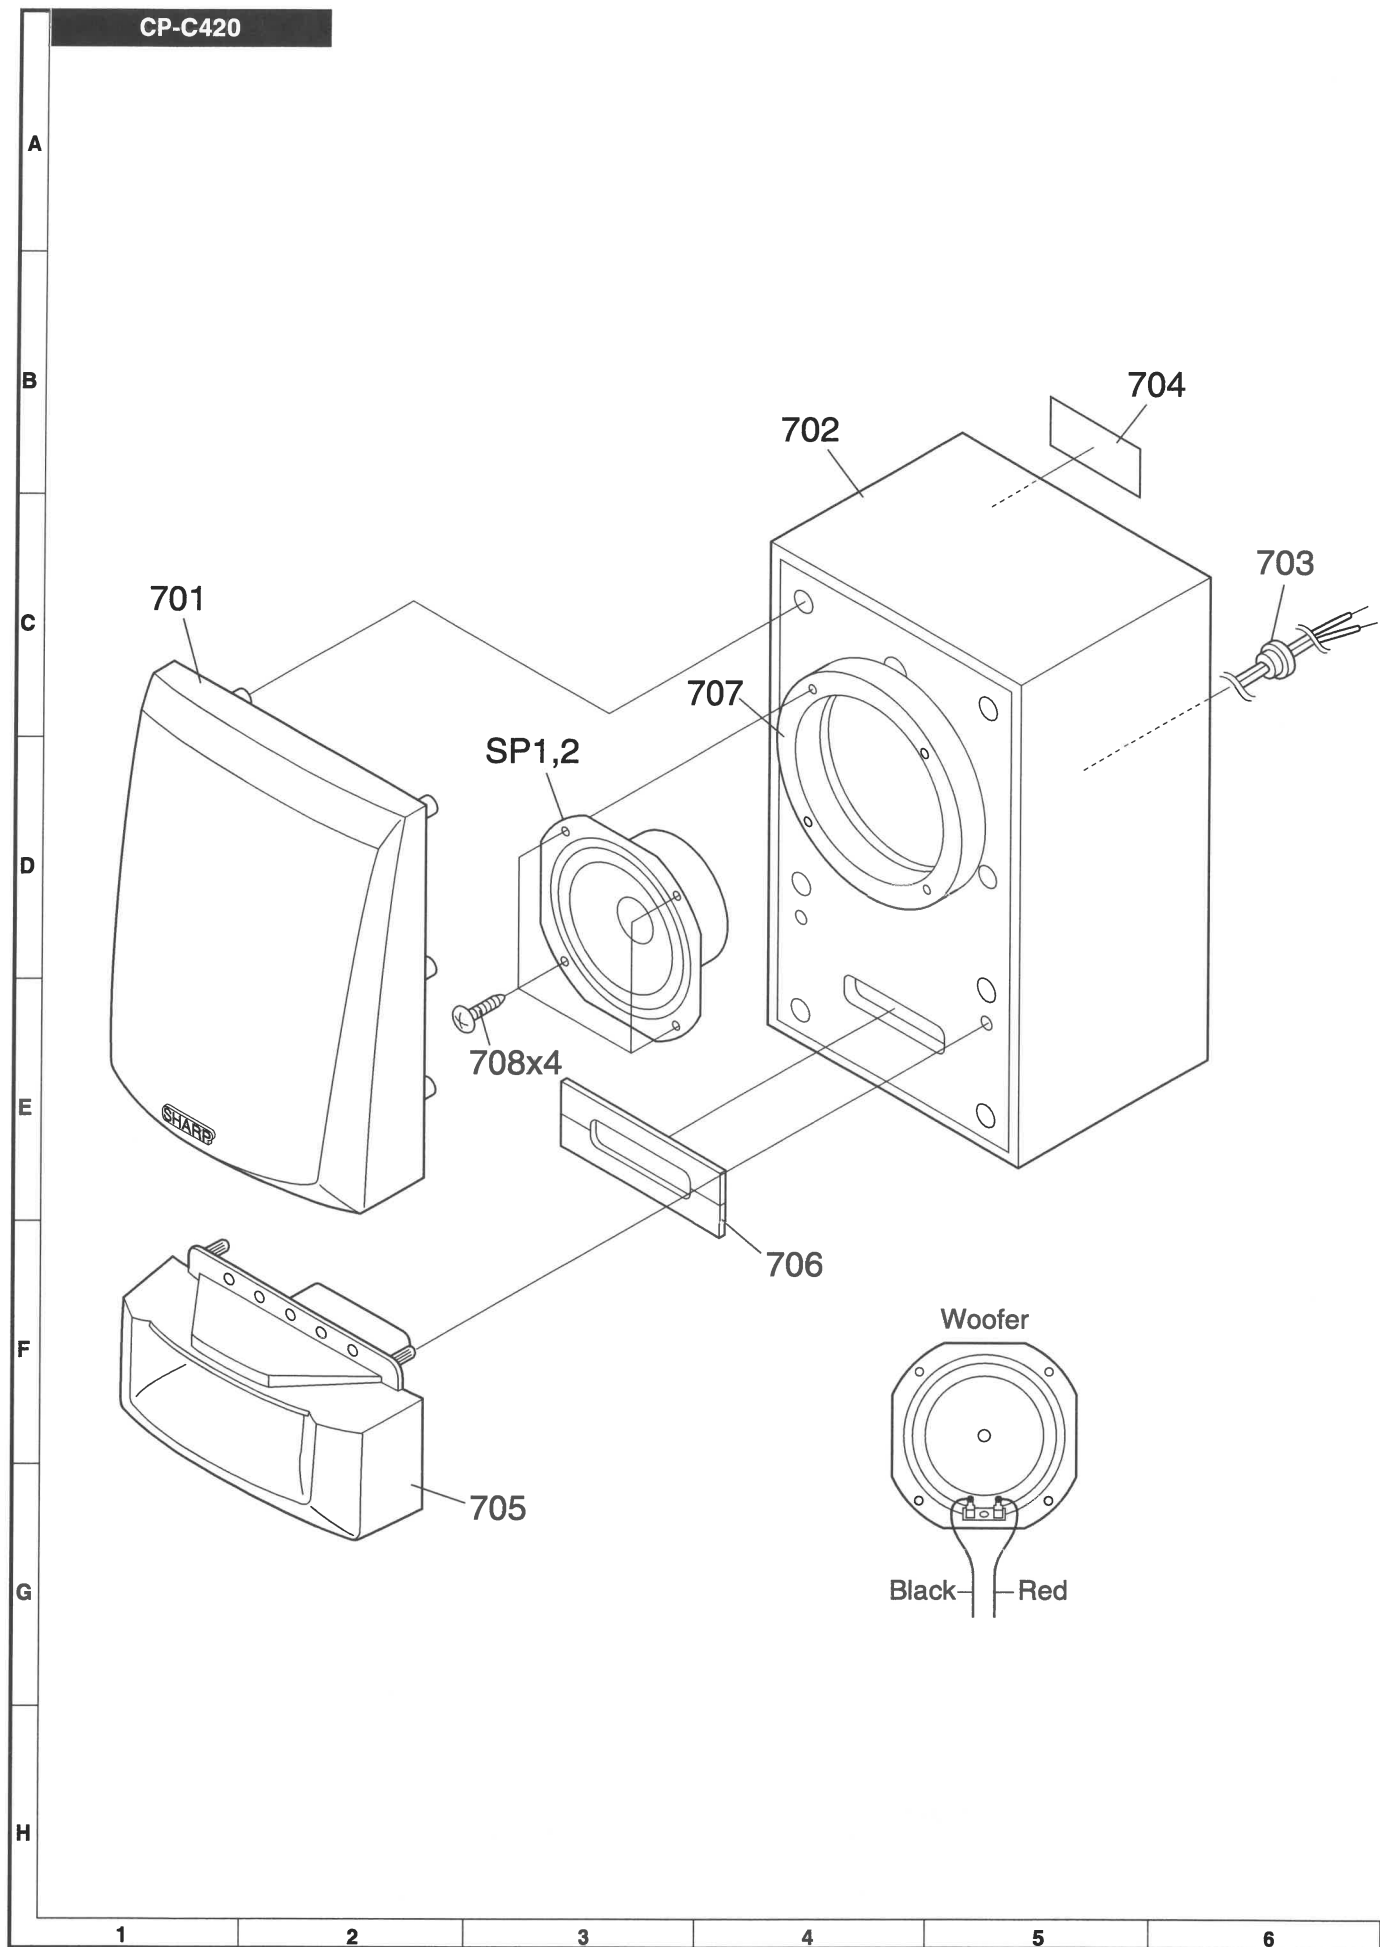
SPEAKER EXPLODED VIEW (1/3)
